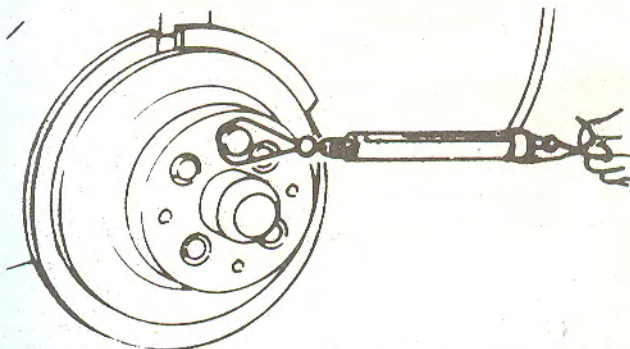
Checking the pre-load of the front wheel bearings with a spring scale.
